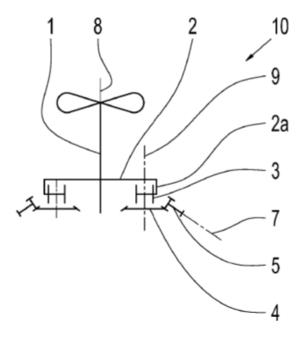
illustrates a toothed gearing with a fixed gear ratio and six intermeshing gears. The gearing includes two driving shafts (5) and a driven shaft (8). Both gearwheels (3) are in mesh with the same internally toothed wheel (2a).
